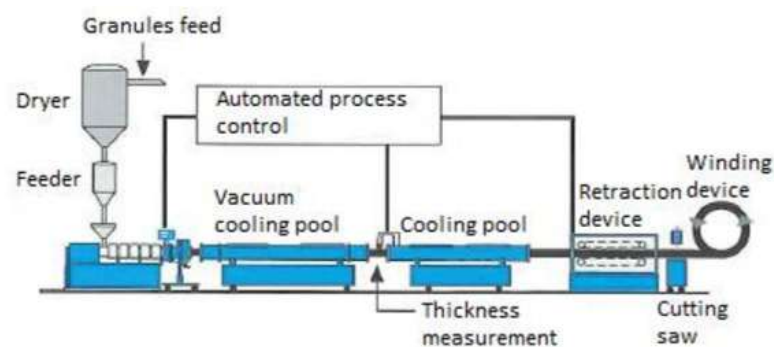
Plastic Extrusion Machine Line (Auvinen, 2013)
